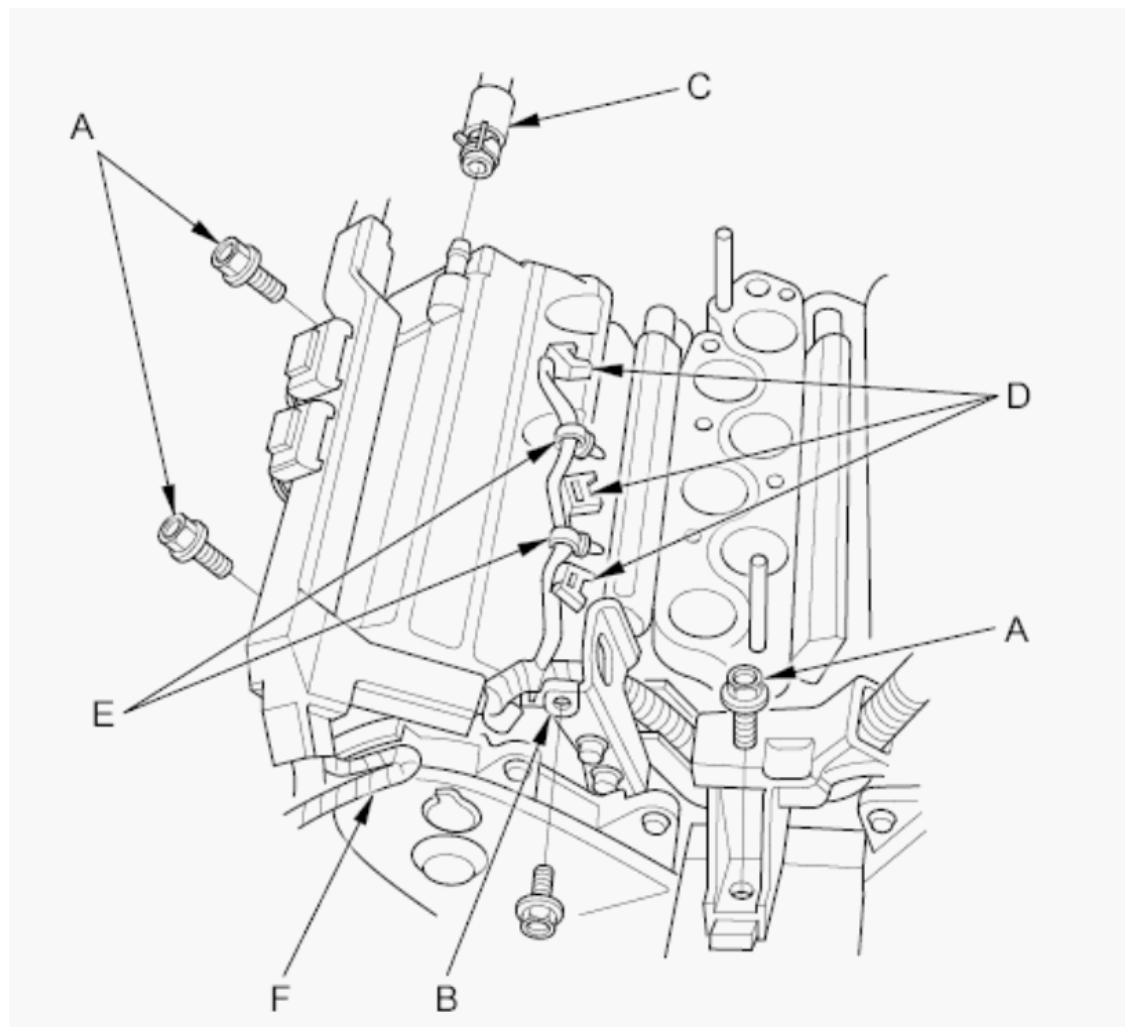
Identifying Harness Holder Mounting Bolts And Breather Hose
